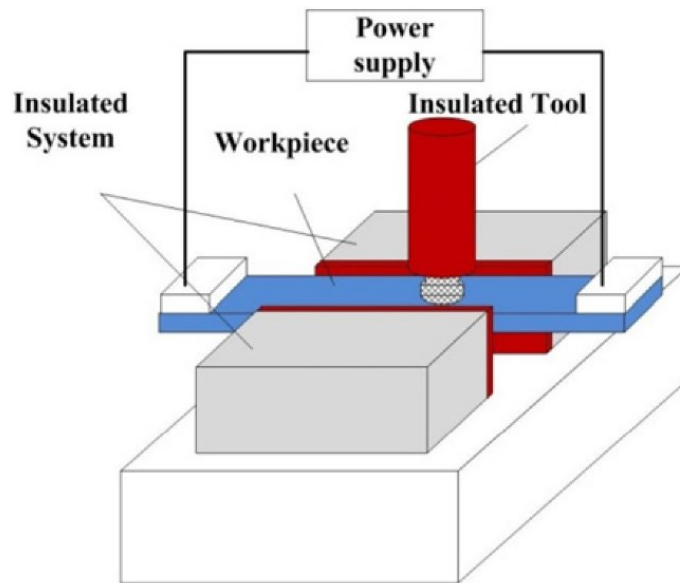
Schematic of an electrically assisted friction stir welding process [129].
